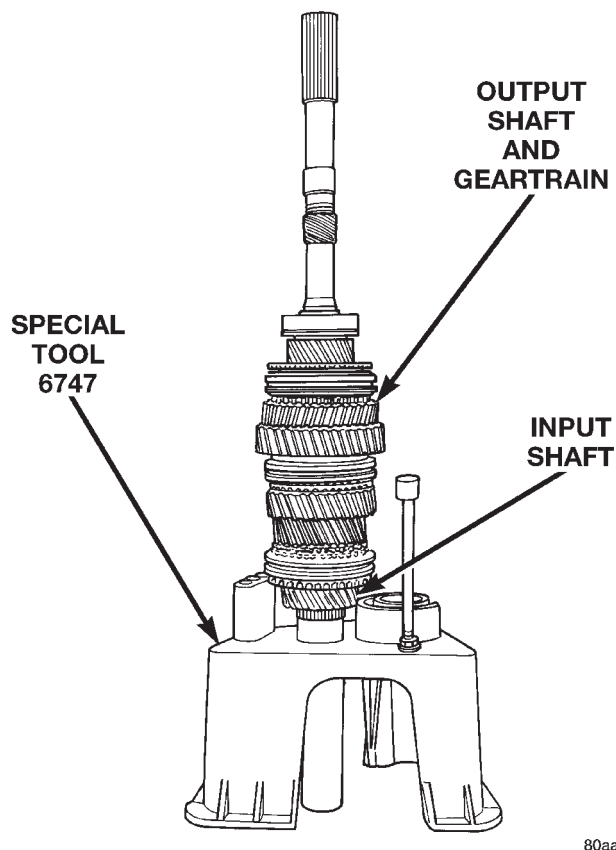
Output Shaft And Geartrain Installed In Input Shaft
